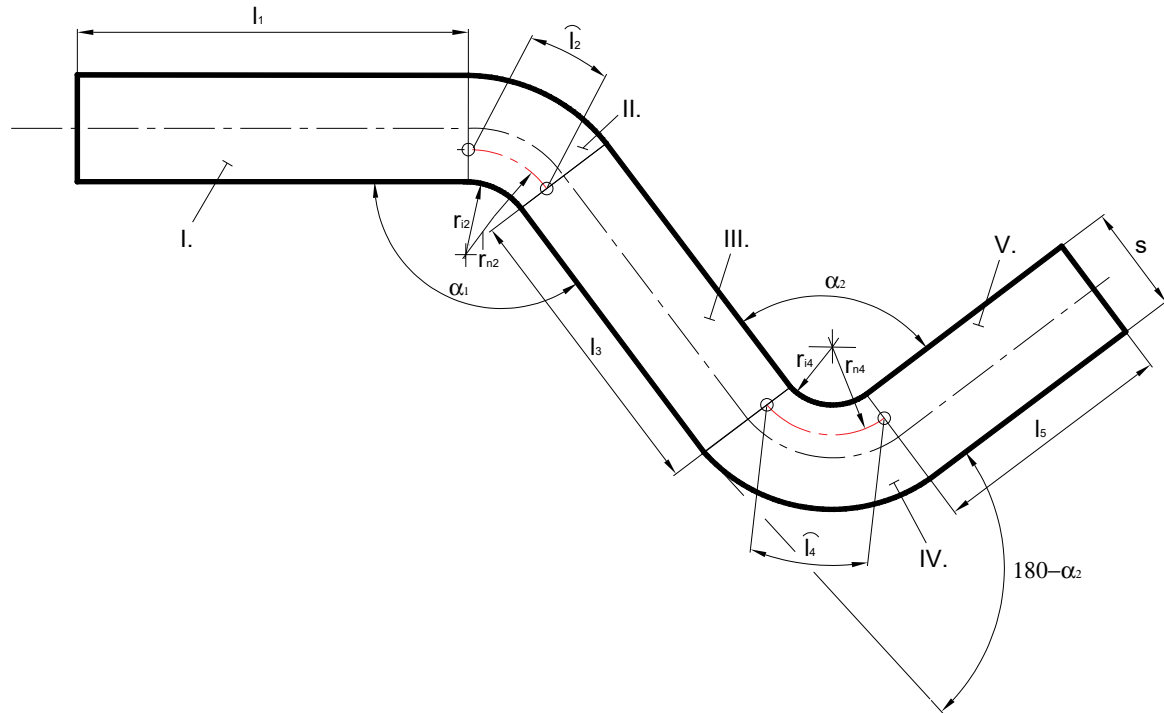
Determination of the cover length and the geometric shape of the workpiece.
